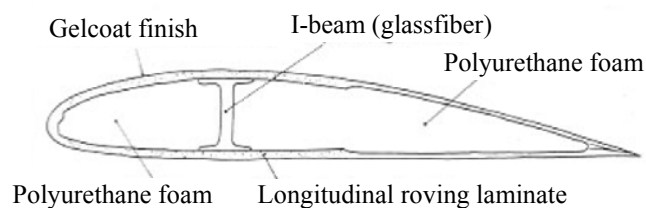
Cross-section details of the re-designed Økær 7.5m blades (adapted from [34]).
